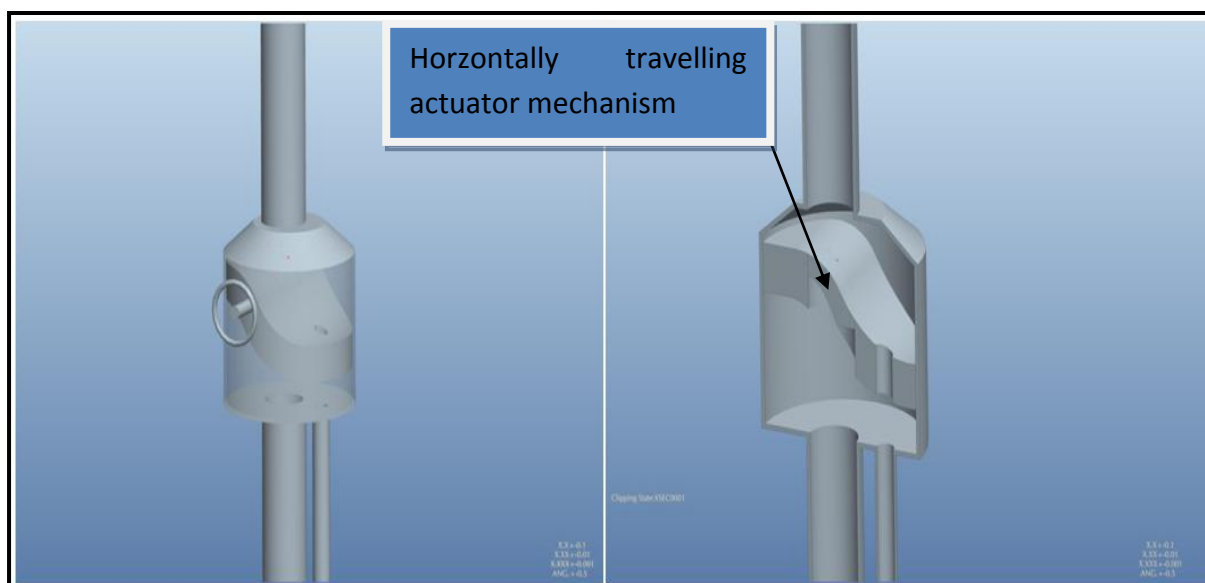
Actuator mechanism inside the bore selector mechanism
